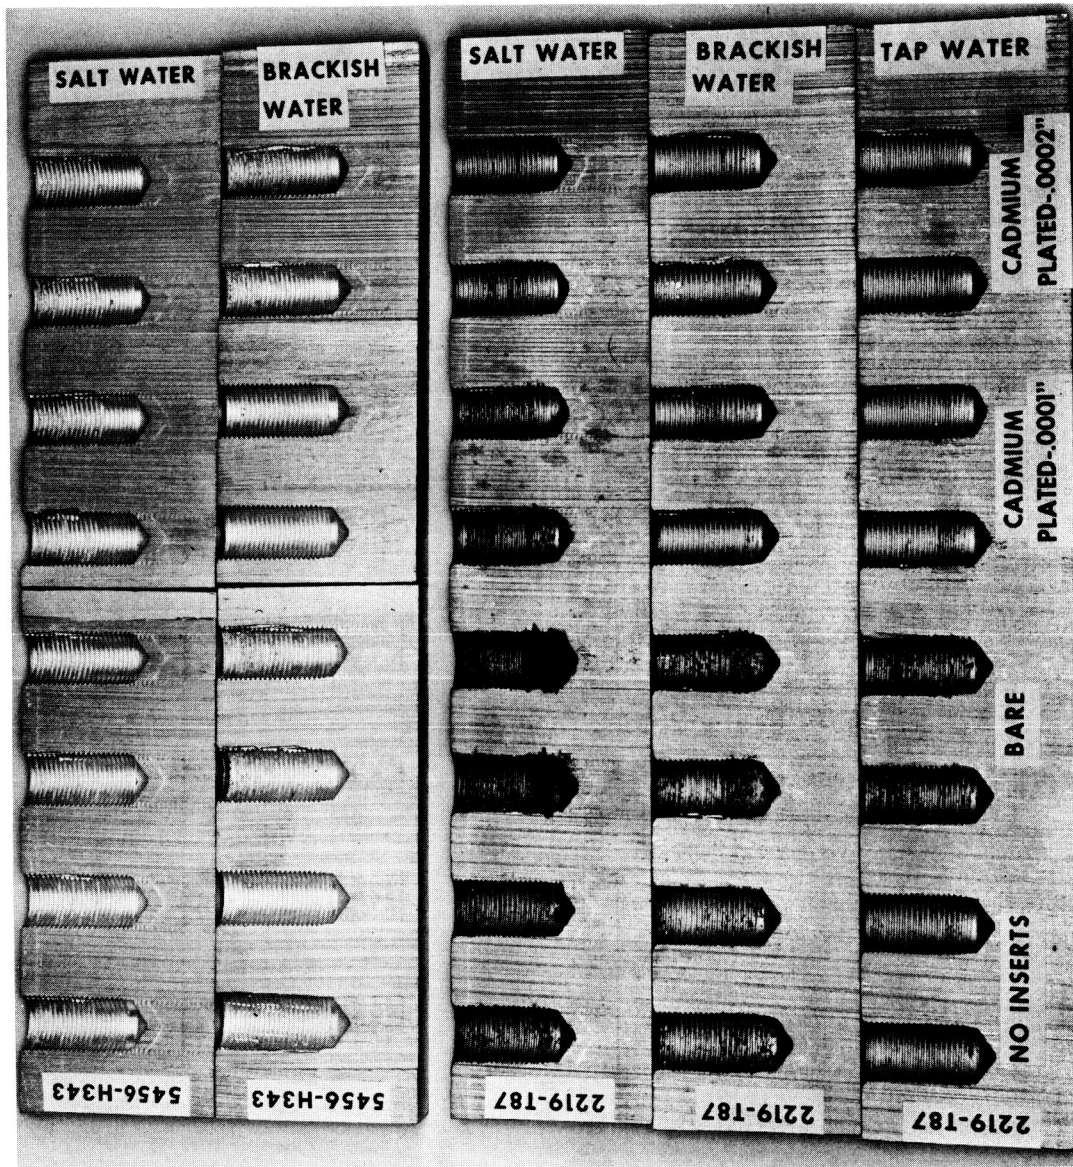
GALVANIC CORROSION OF 2219 and 5456 ALUMINUM BLOCKS BY STAINLESS STEEL WIRE INSERTS
